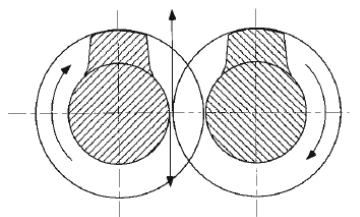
Sliding type of intermeshing in co-rotating twin screw extruders
